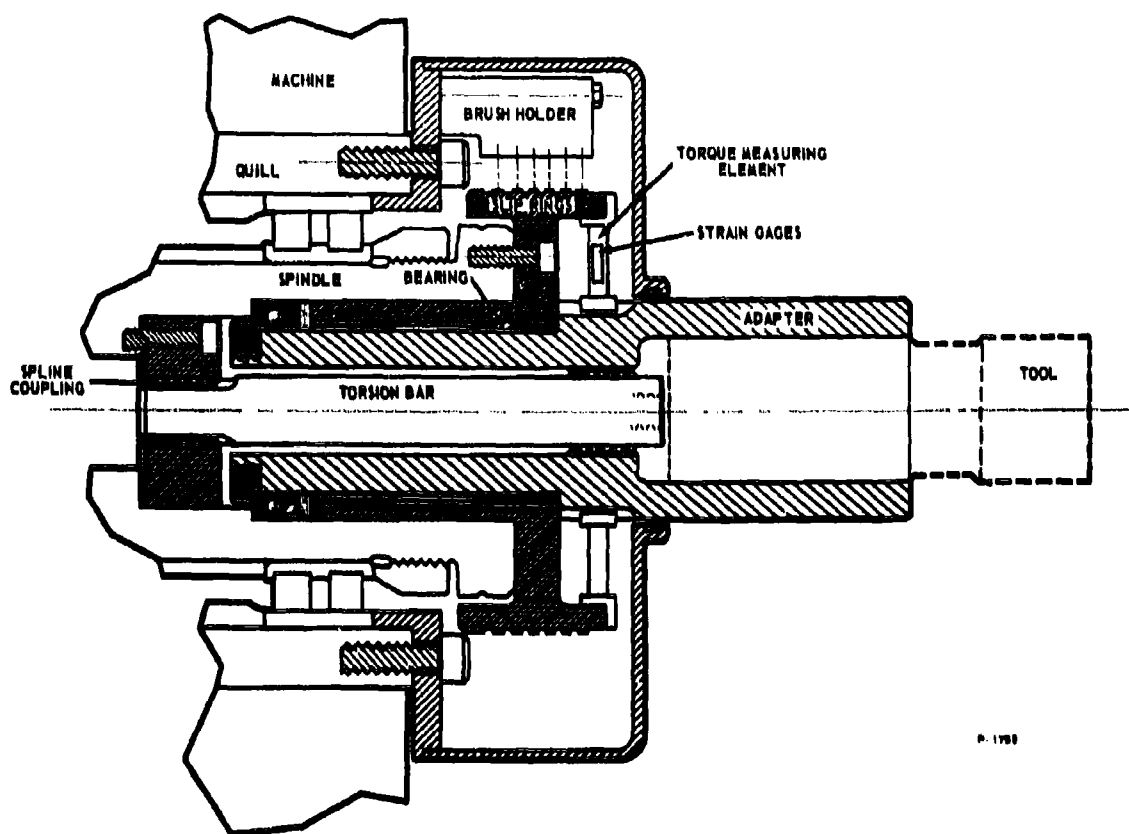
Cross-Sectional Diagram of Proposed Spindle Adapter
